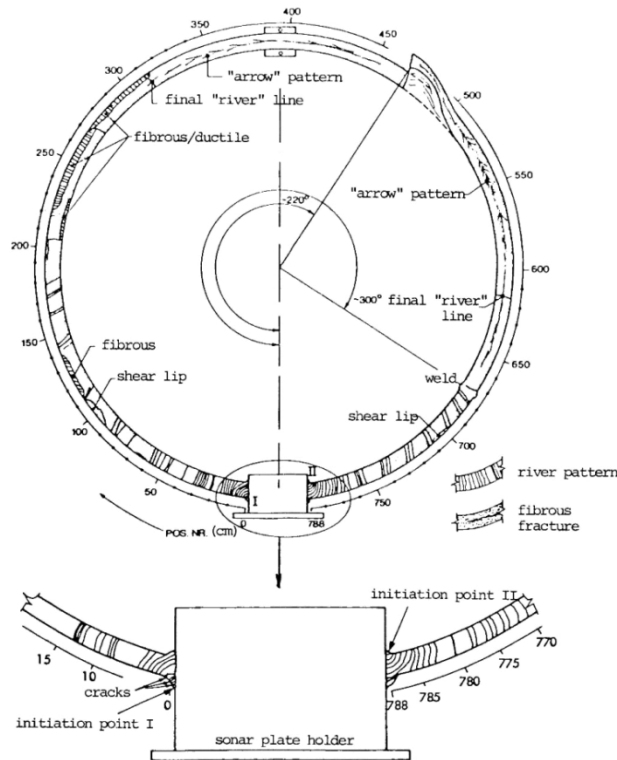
Mapping of the fracture surface (metallographical investigation) – detailing of the sonar plate to bracing welded joint [1.4]
